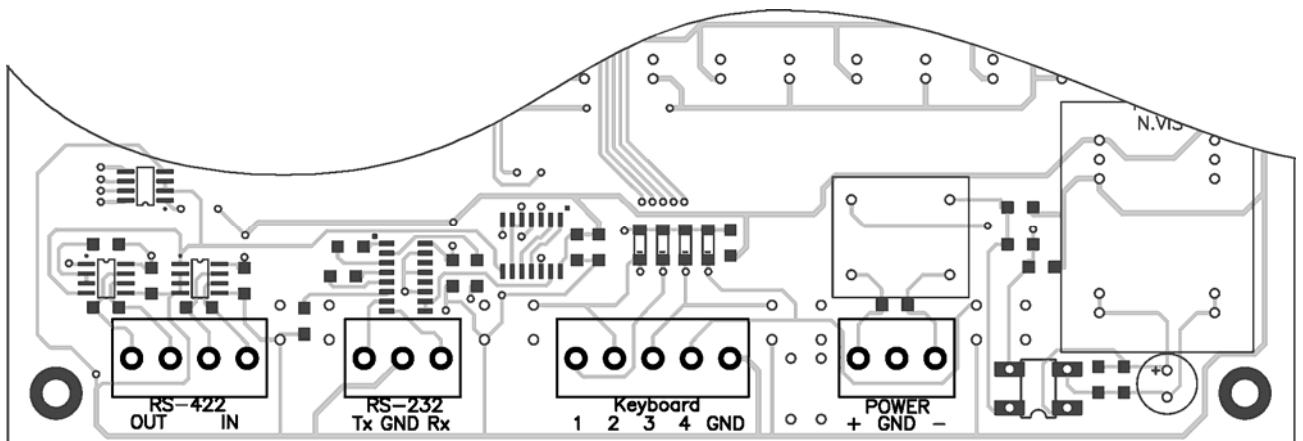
Terminal blocks arrangement on DR-109 PCB.
